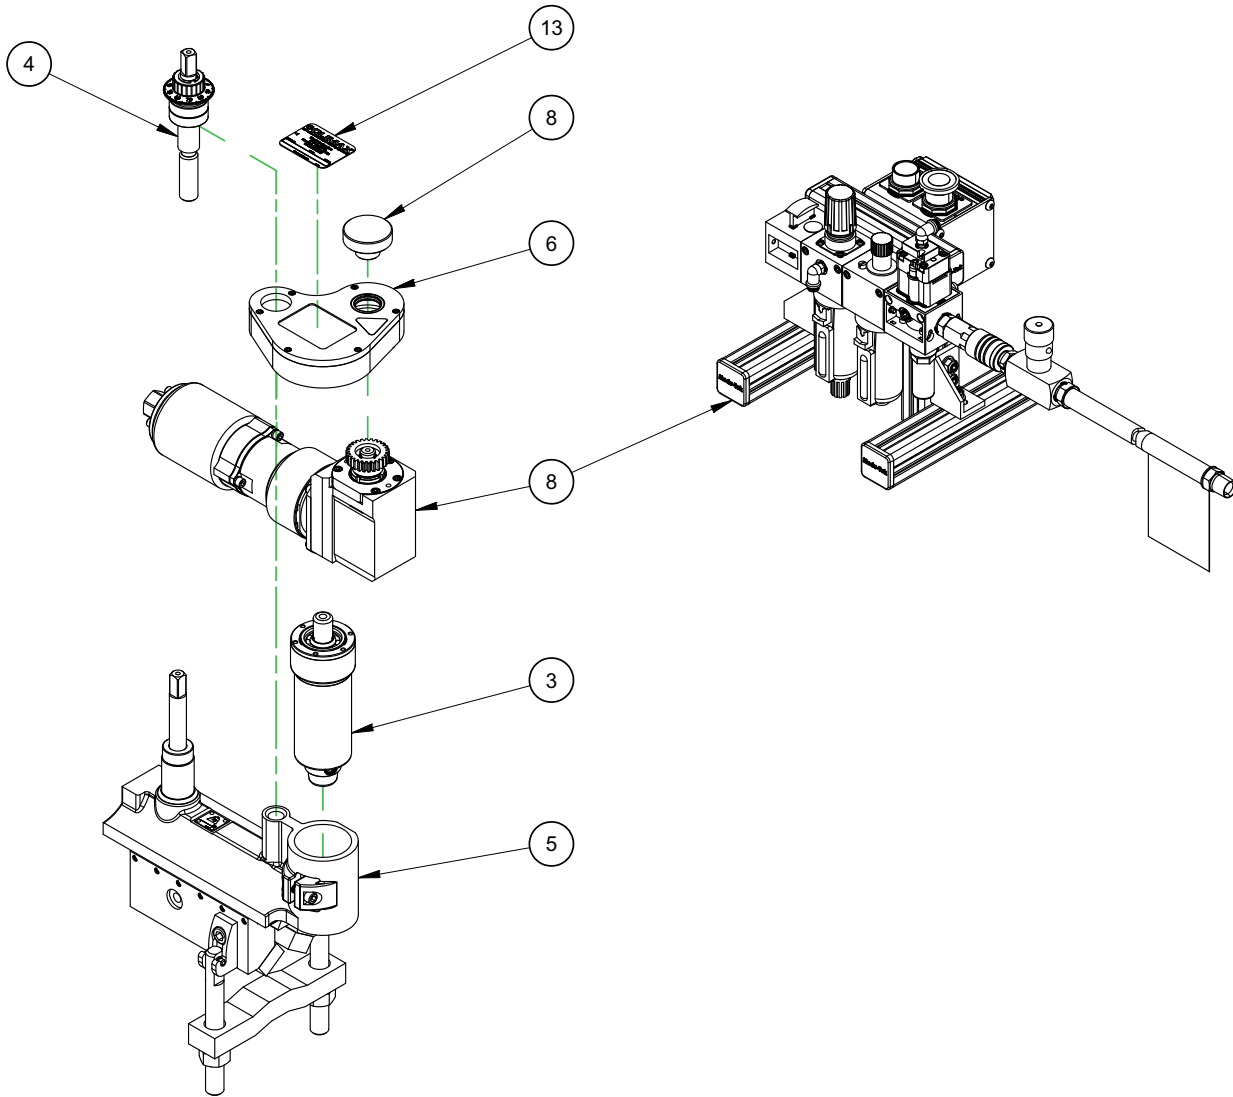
KM3000/KM4000 ASSEMBLY (P/N 103548)
